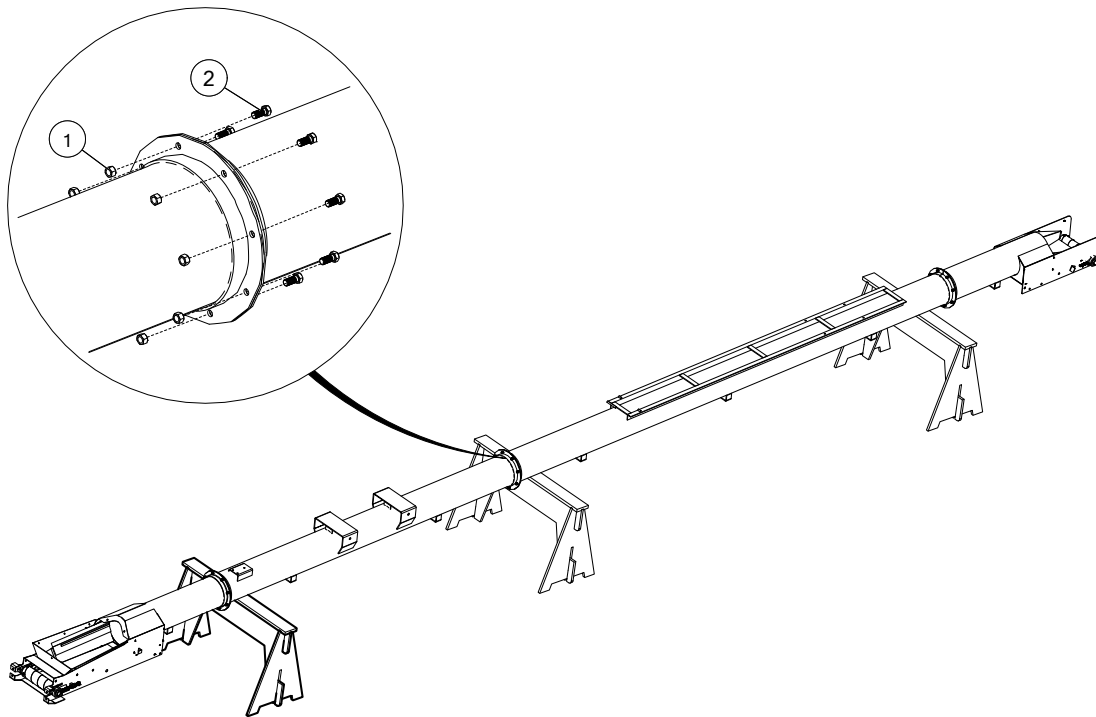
Conveyor Tube Layout for 1565 Model (Batco & Westfield)
